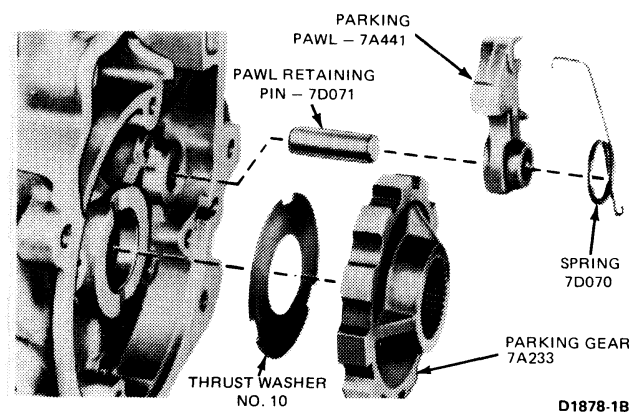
Parking Pawl, Return Spring Retaining Pin and Gear
